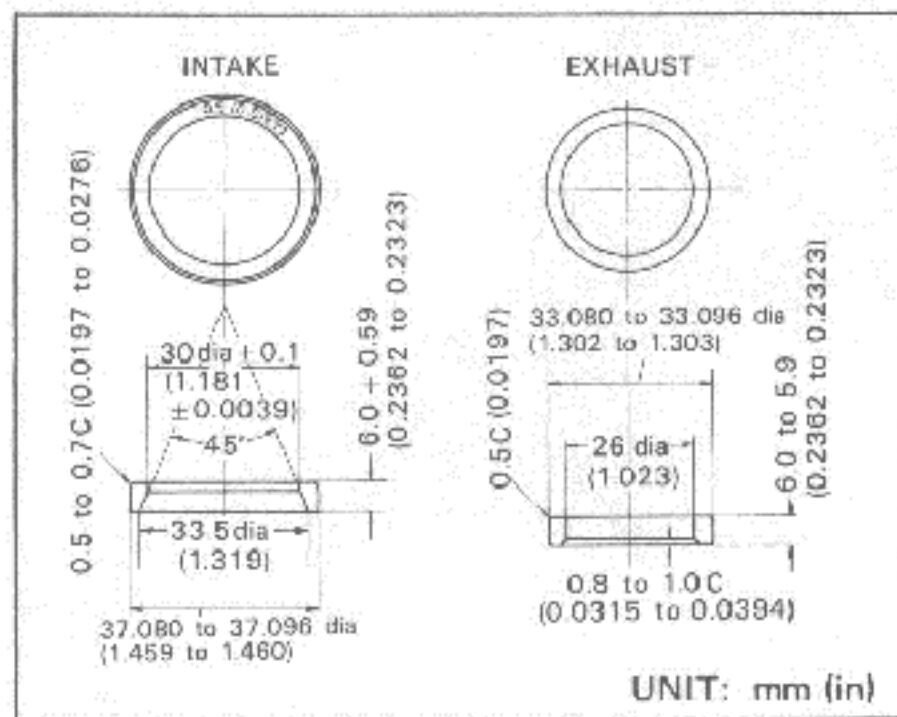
Standard valve seat insert (A10 and A12 Engine)
